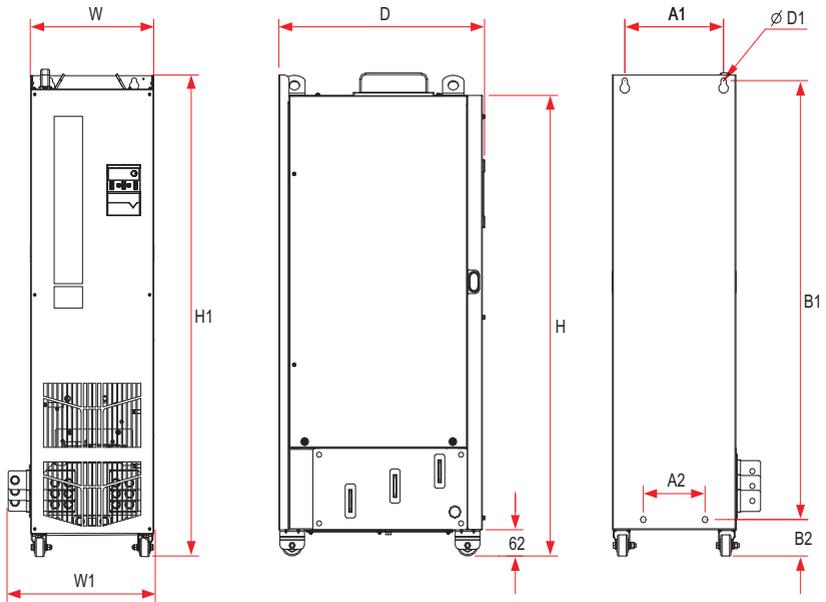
Overall and mounting dimensions of VDF750T200G to VDF750T450G
